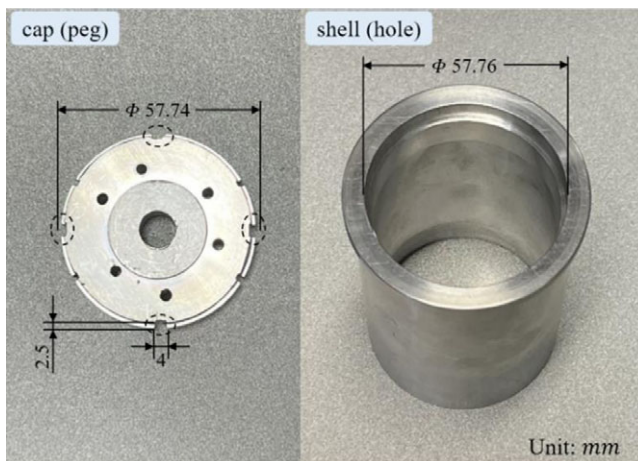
The assembly test pieces used for manufacturing a precision instrument.
